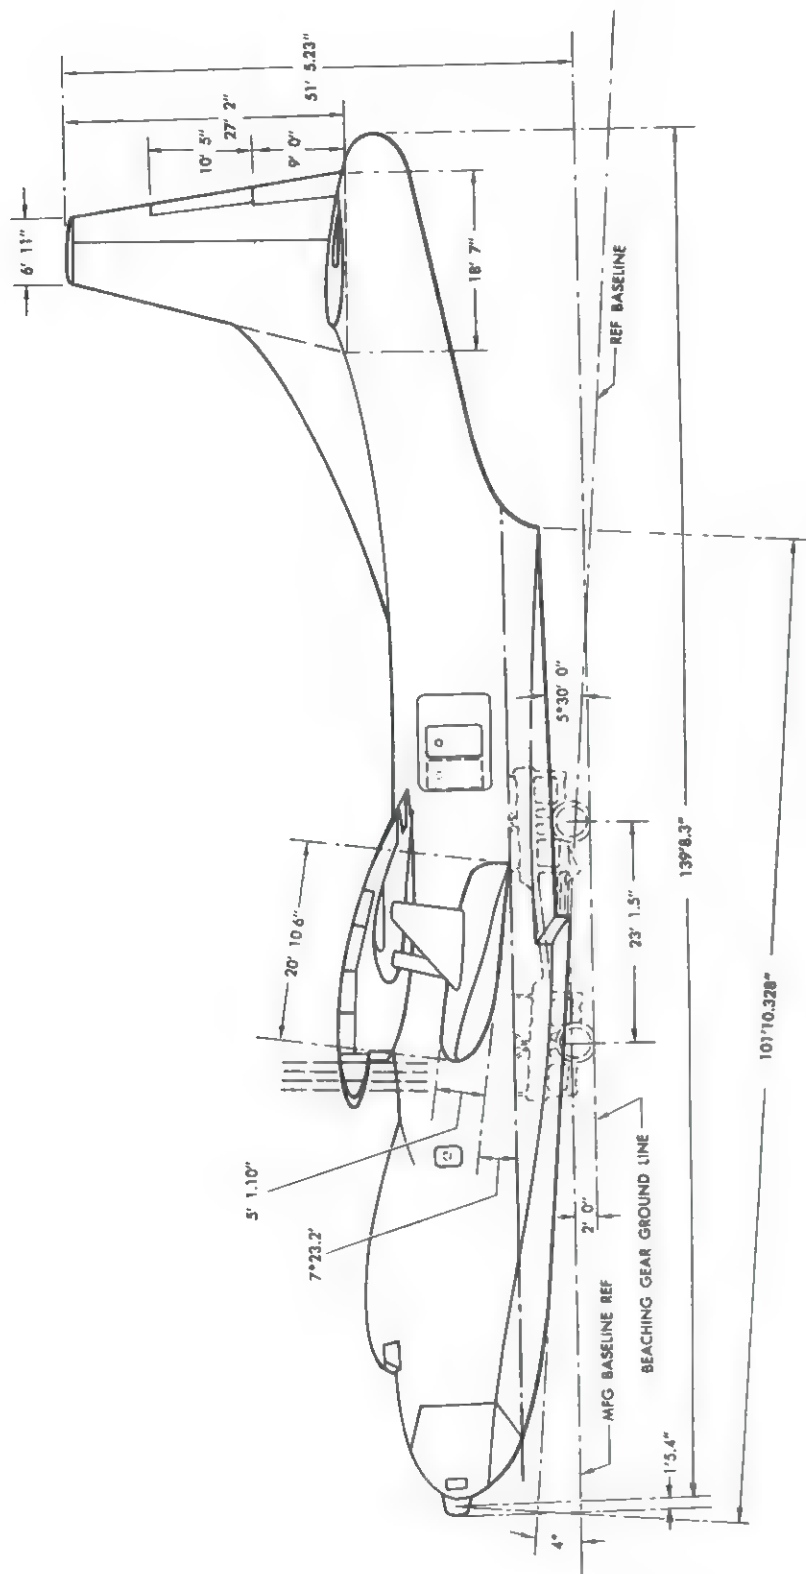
Three View Drawing (Sheet 1 of 3)
